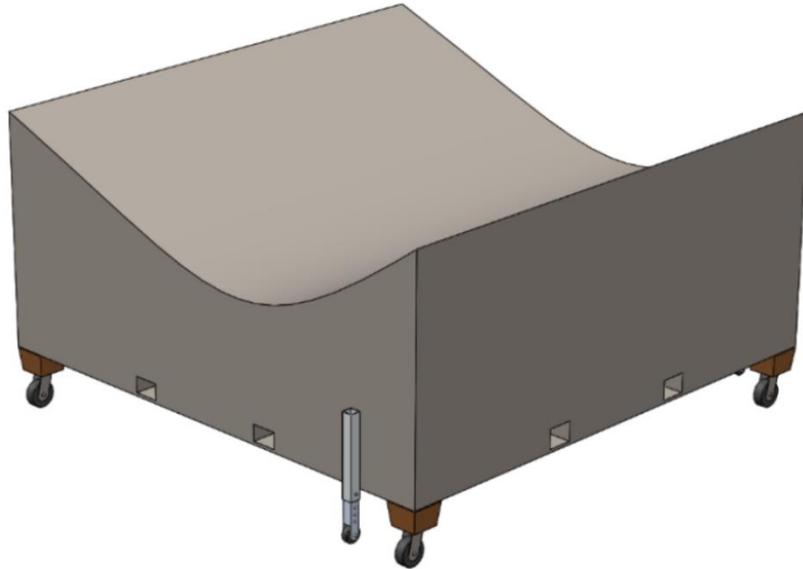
Retractable Rail Casters and Hole/Pin Locking Concept
